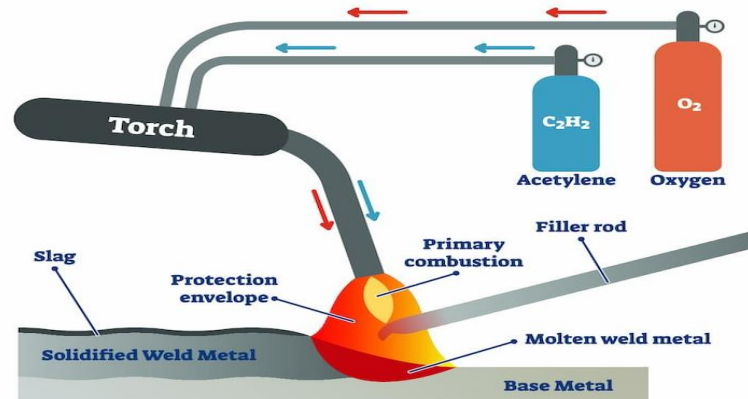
Schematic diagram of gas welding [10]
